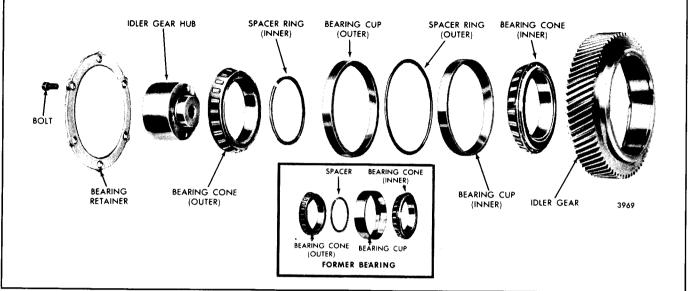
Idler Gear Details and Relative Location of Parts (Current Bearing)
